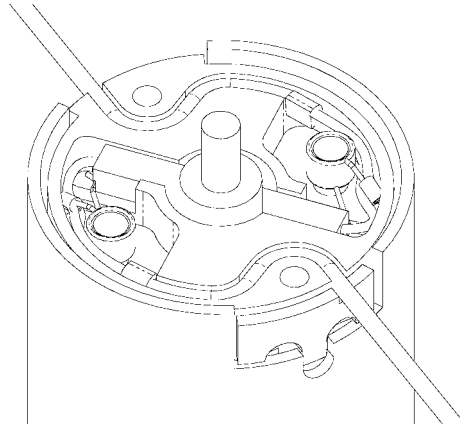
Illustration of Replacement Brush Holder Assembly, with leads, brushes and springs positioned correctly
